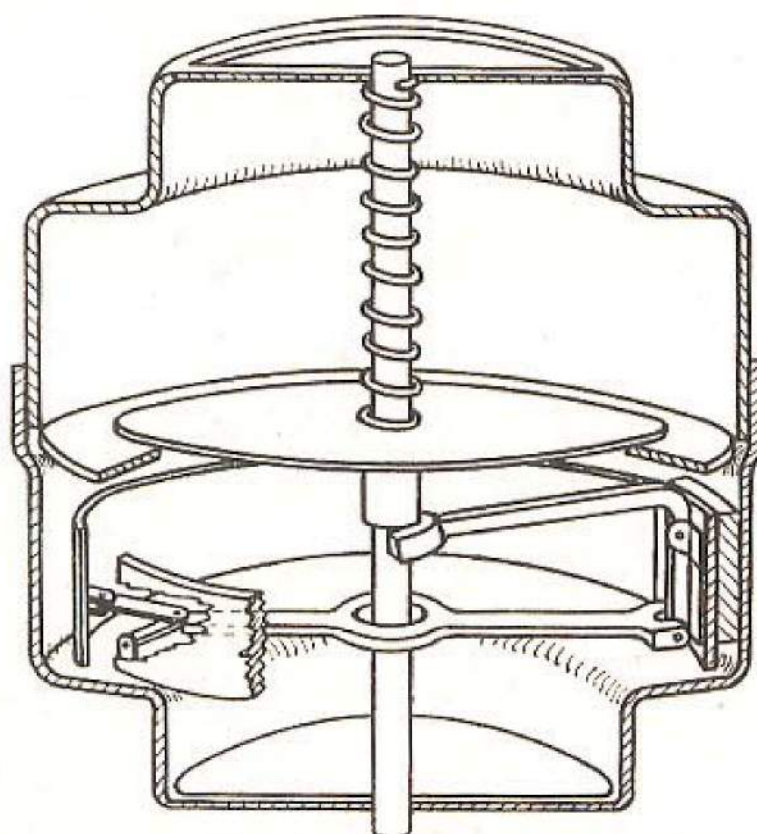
Car thermostat : bimetallic-strip type ("Thermet").
